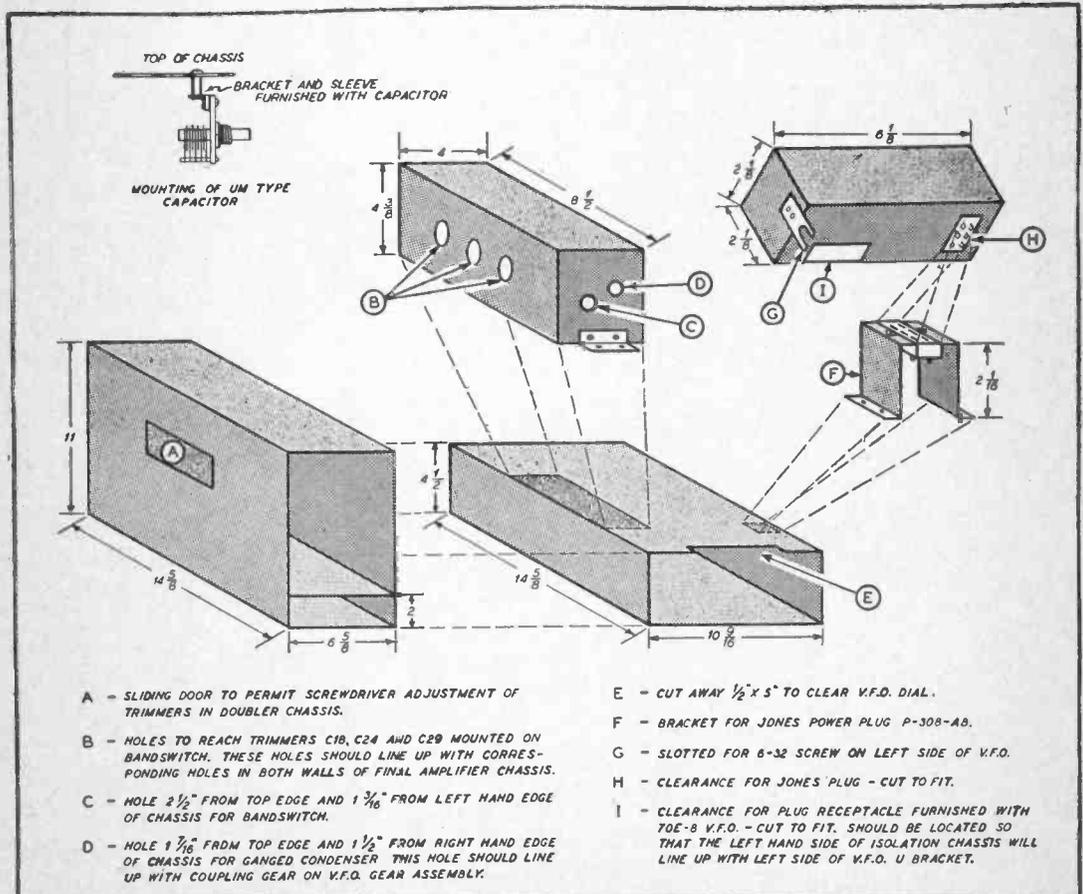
Assembly drawing and dimensions for principal units in Gold-Plated Special. Sliding door A is actually only required on right side of cabinet. Surfaces marked on top of main chassis are not cutouts, but indicate where the sub-units mount.
